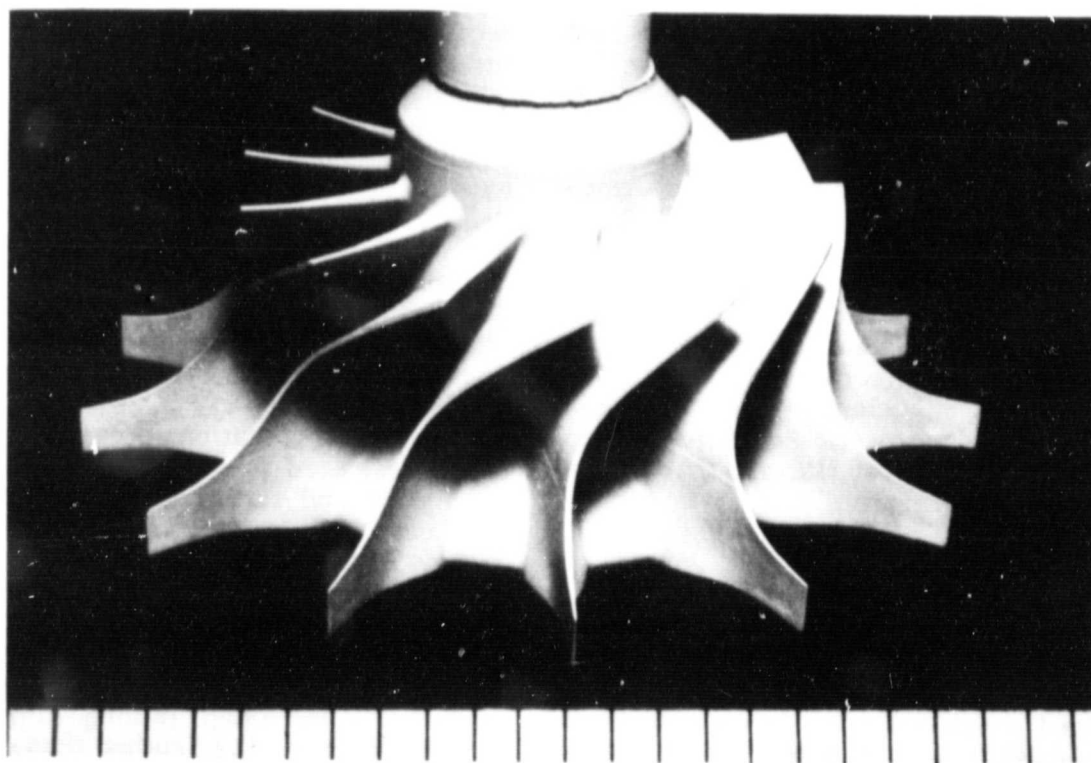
Blade Detail, ACC SNN Turbine Rotor.
